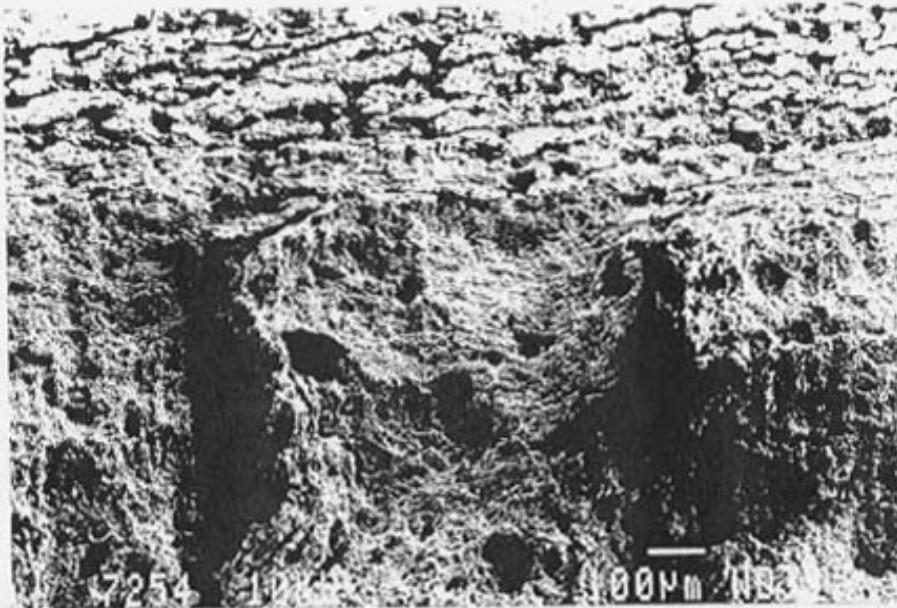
Inner portside A2 hinge lug fatigue crack starting (ratchet marks)
